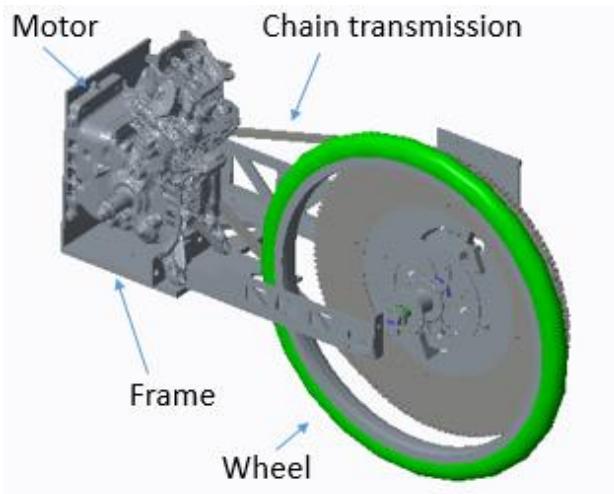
Assembly of the frame including the chain mechanism, wheel of the car and frame.
